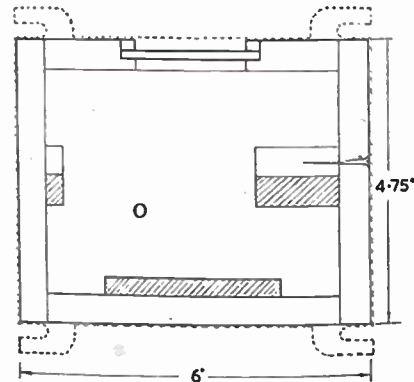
Foam pads indicated by shading. Dotted outline shows aluminium base in position.
